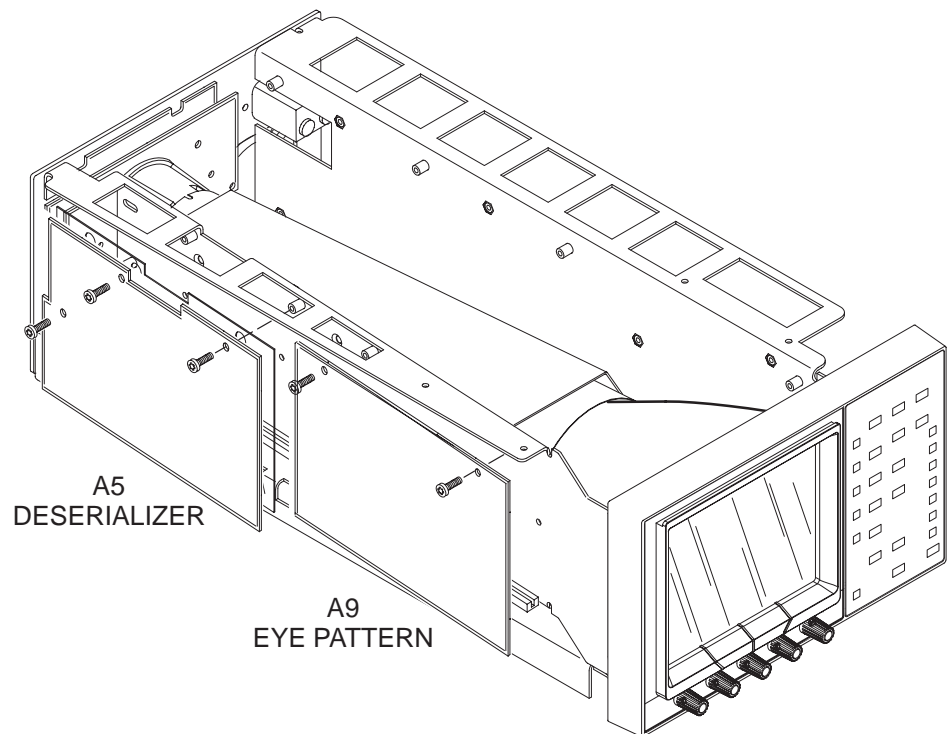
Removing the Deserializer and Eye Pattern Boards
